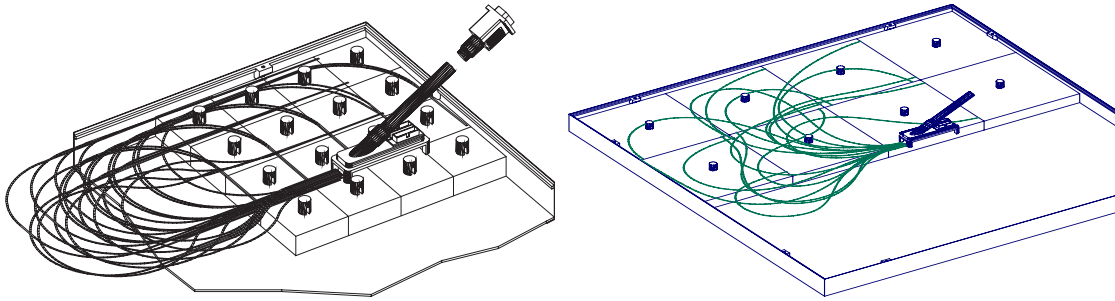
Fibres routing inside the inner (left) and the outer (right) module box with pads.
